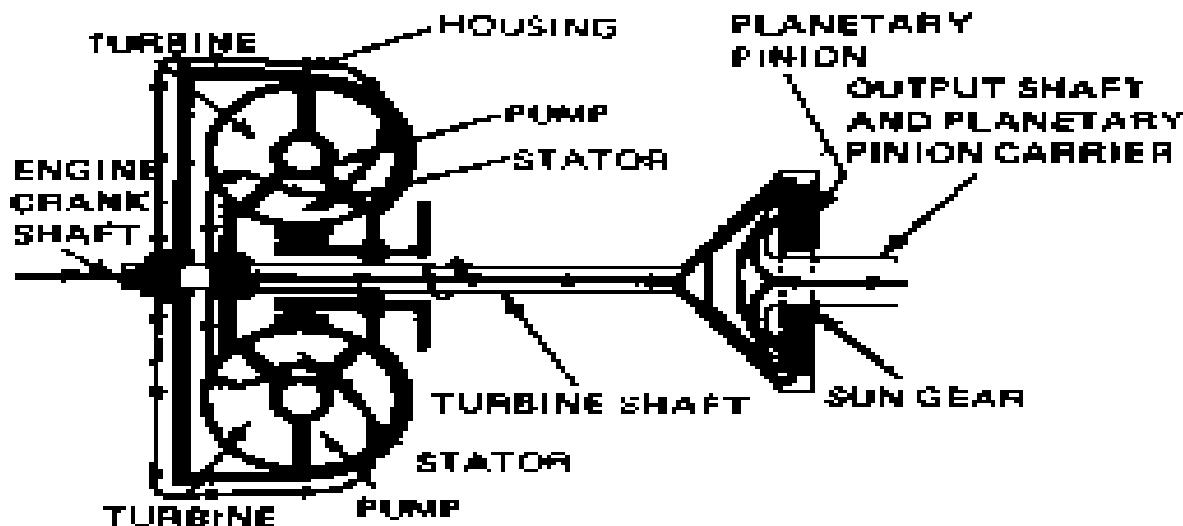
Power Flow Through Torque Converter To Planetary Gears
